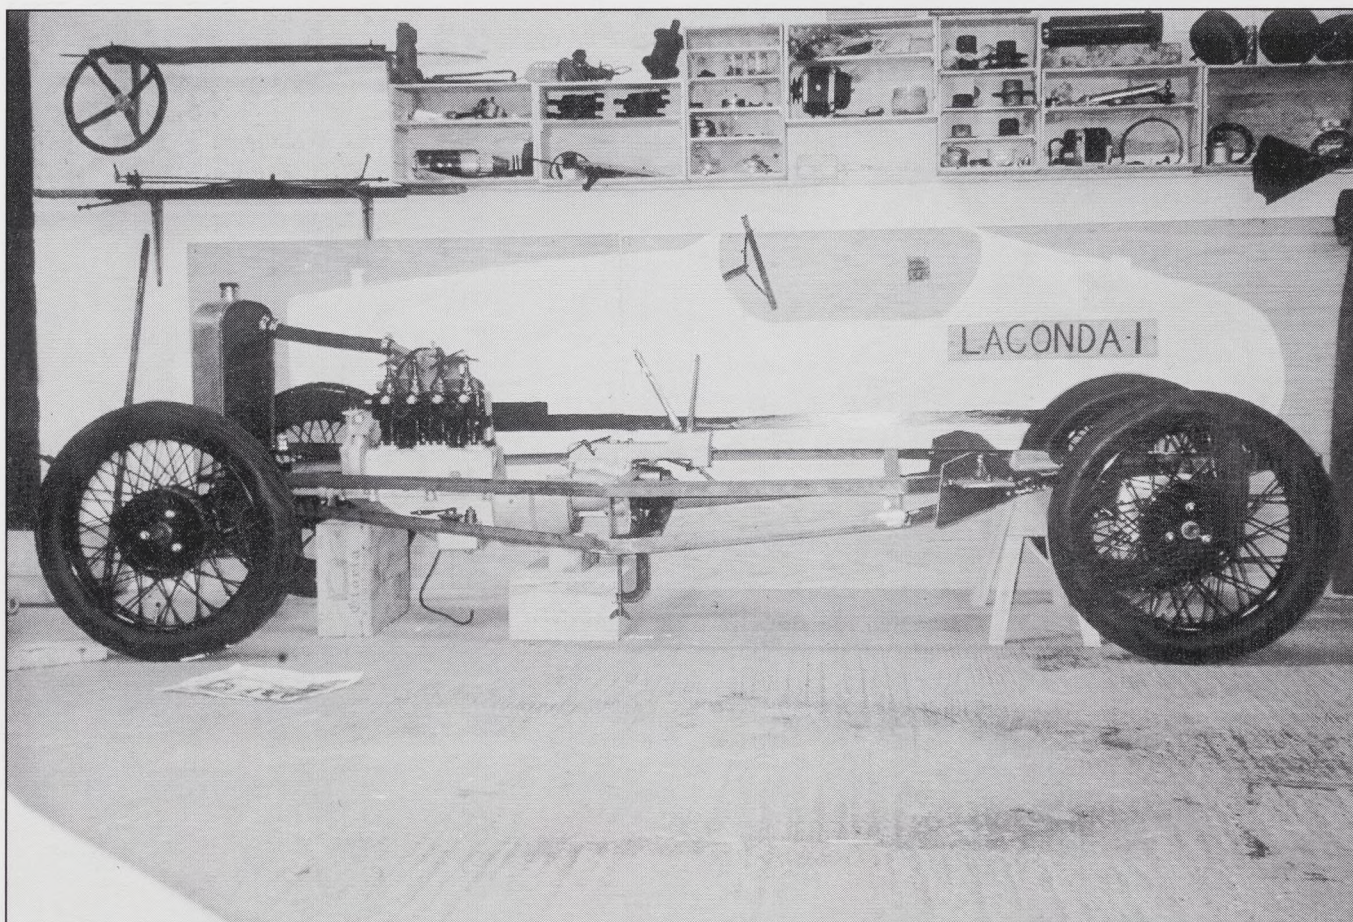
, the chassis lined up with the full scale outline on the wall.
